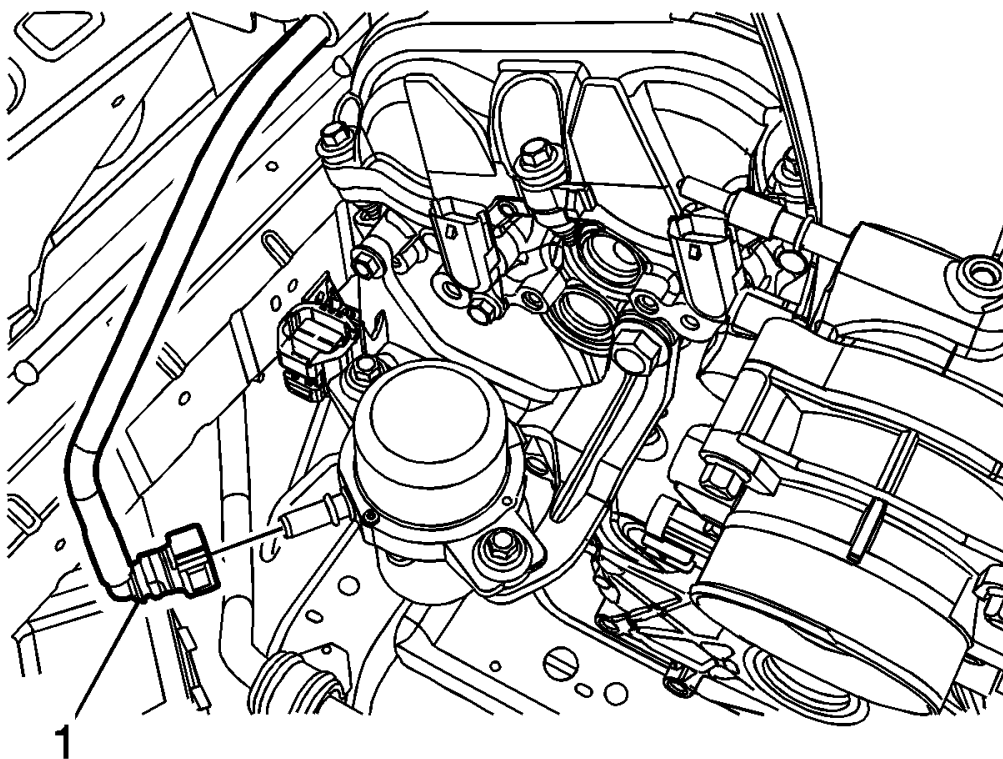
Power Brake Booster Vacuum Hose Quick Connect At Power Brake Booster Vacuum Pump (LFX)
